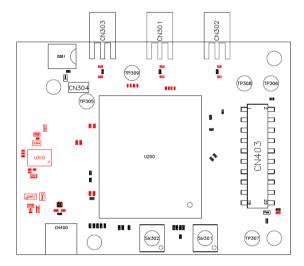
Default Soldering Configuration for Jumpers for the SL501x Socket Board (Top View)
